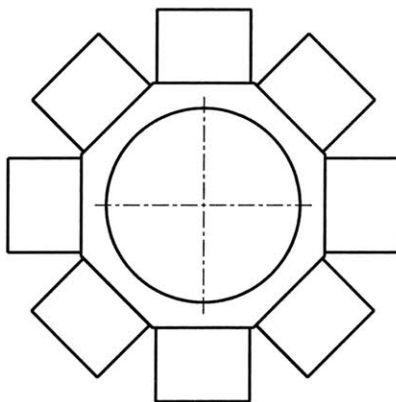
Drawing of the octagonal back iron with eight NdFeB magnets glued to it. A detailed mechanical drawing is shown in Figure D-4 of Appendix D.
